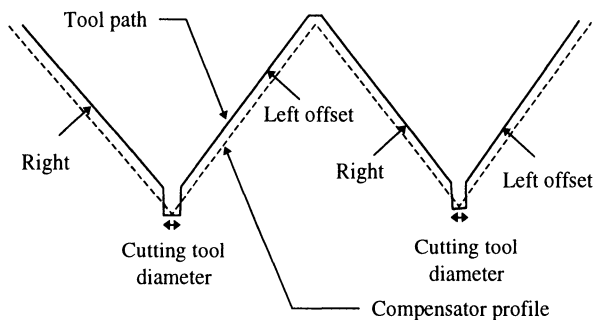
Illustrating the generation of a tool path from a 'W' shaped compensator profile
